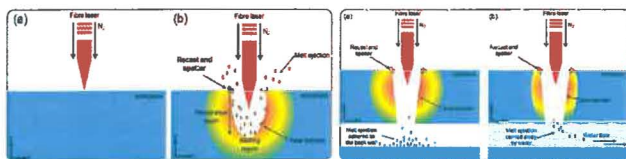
The physical process in laser micro-machining and drilling process with a static beam, (a) initial arrangement (b) Partial penetration depth.
